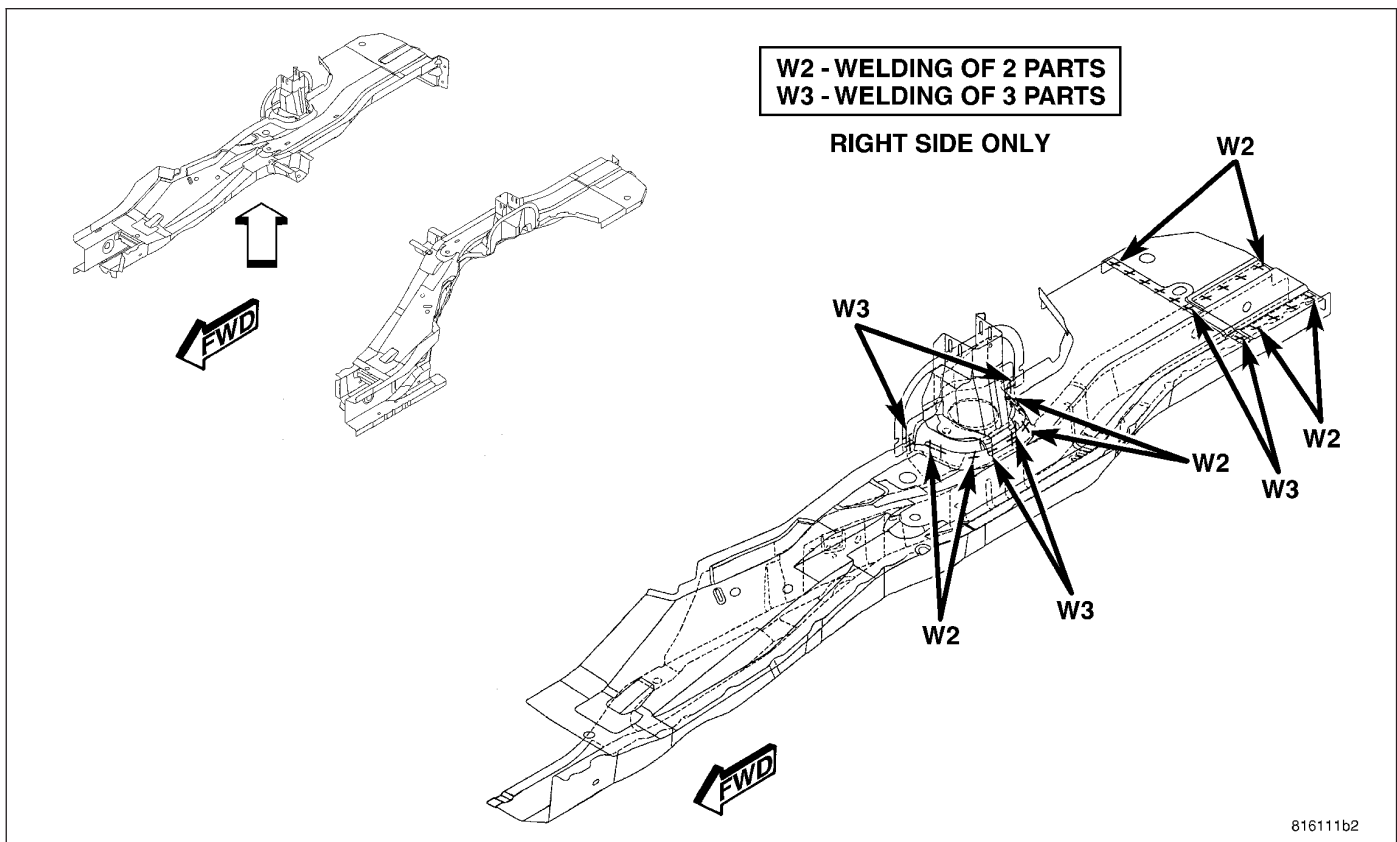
SIDEMEMBER ASSEMBLY (9 OF 17)
